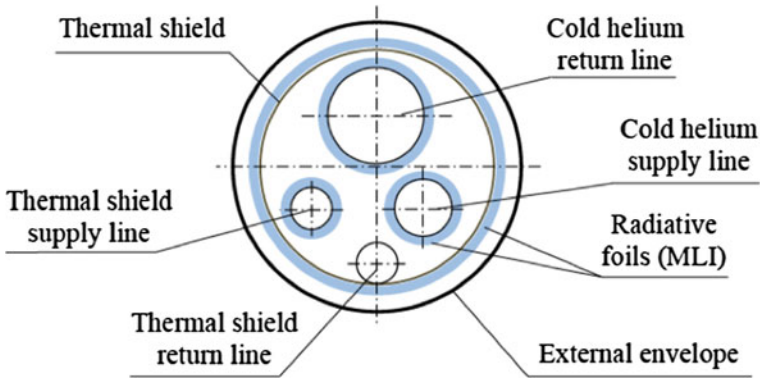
Cross section of a typical multiline cryogenic transfer line—Courtesy J. Fydrich, ESS (see Chap. 9)
